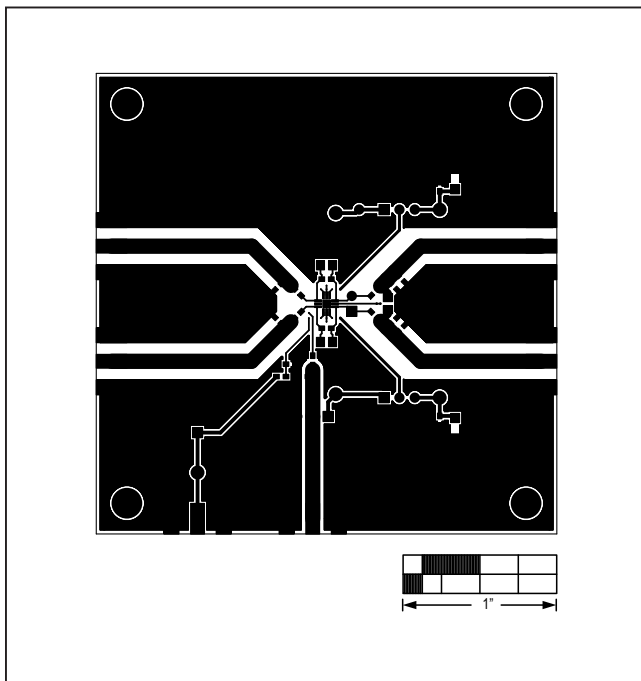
MAX44205 EV Kit PCB Layout—Component Side
